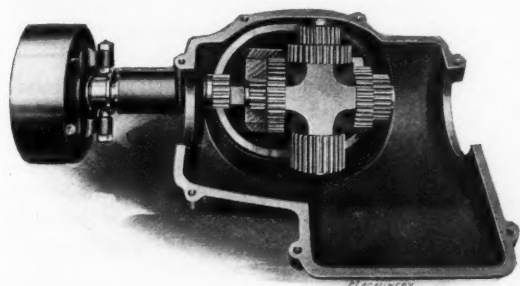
Arrangement of Speed Change Gears on 14-inch Lathe
